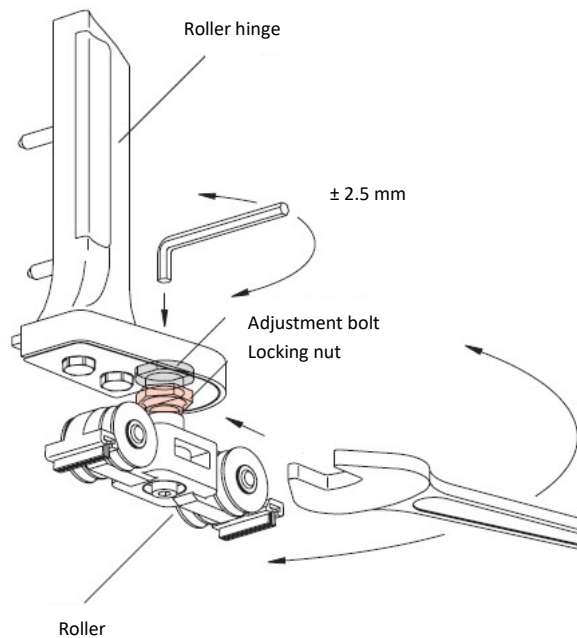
Adjusting ROTO Patio 6080 with an open-end spanner
